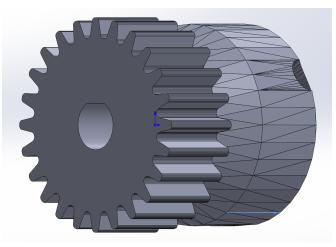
Primary Sun-Gear Connected to Motor (Solidworks Model)
